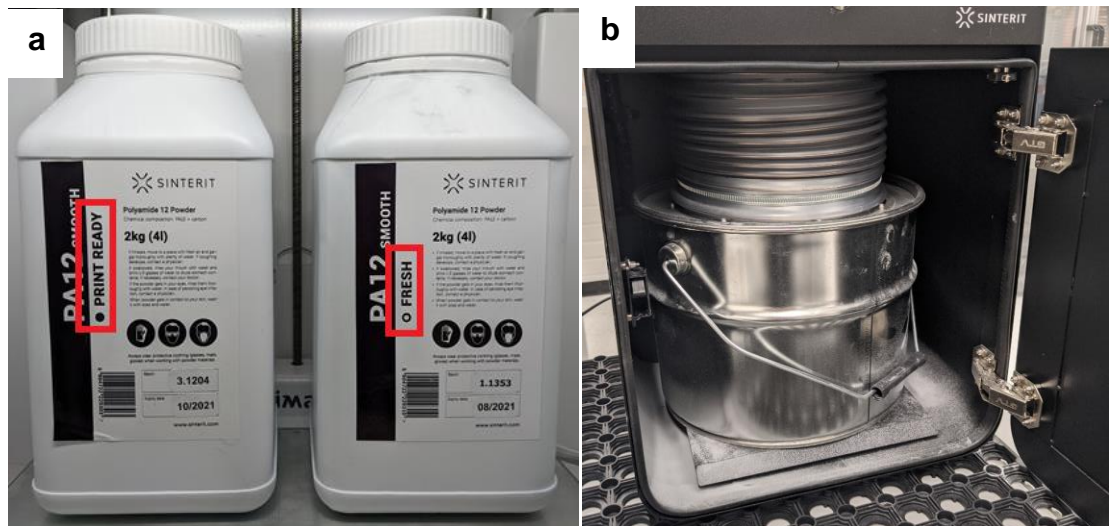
"FRESH" and "PRINT READY" powder containers (a) and properly inserted powder capture container (b)
